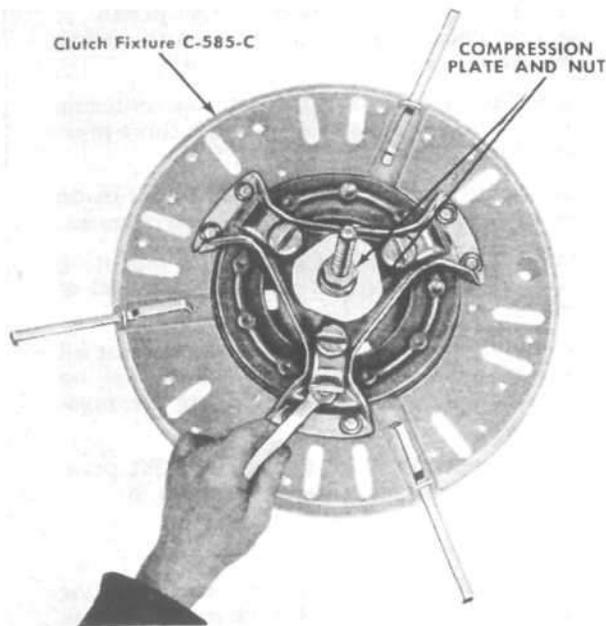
DISASSEMBLING AUBURN CLUTCH
